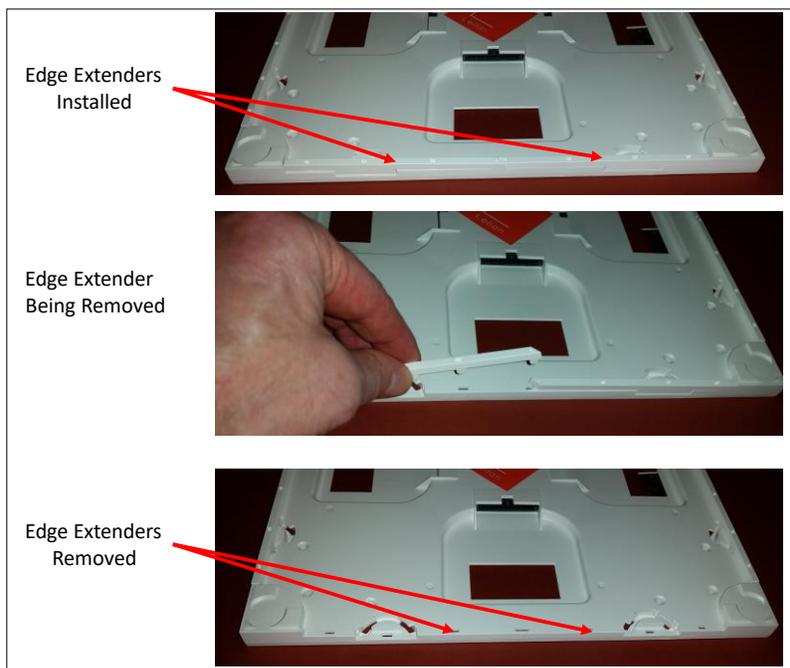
Edge Extenders Installed, Being Removed and Removed.
